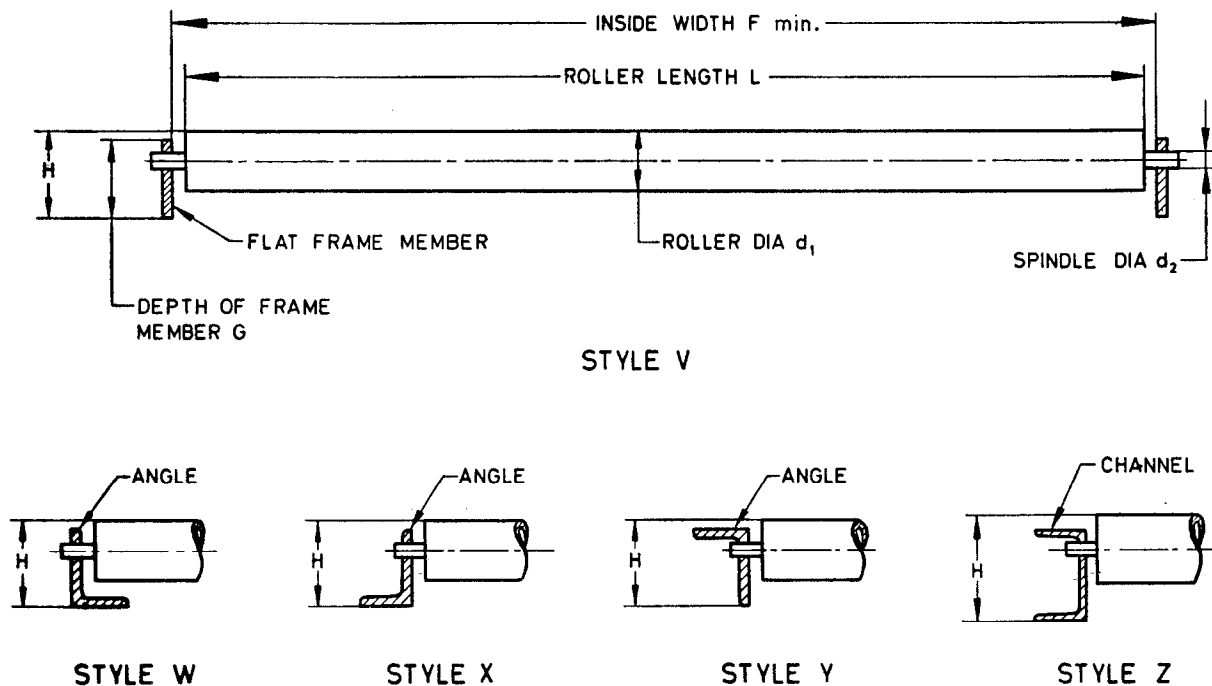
TYPICAL ARRANGEMENT OF FRAME MEMBERS
